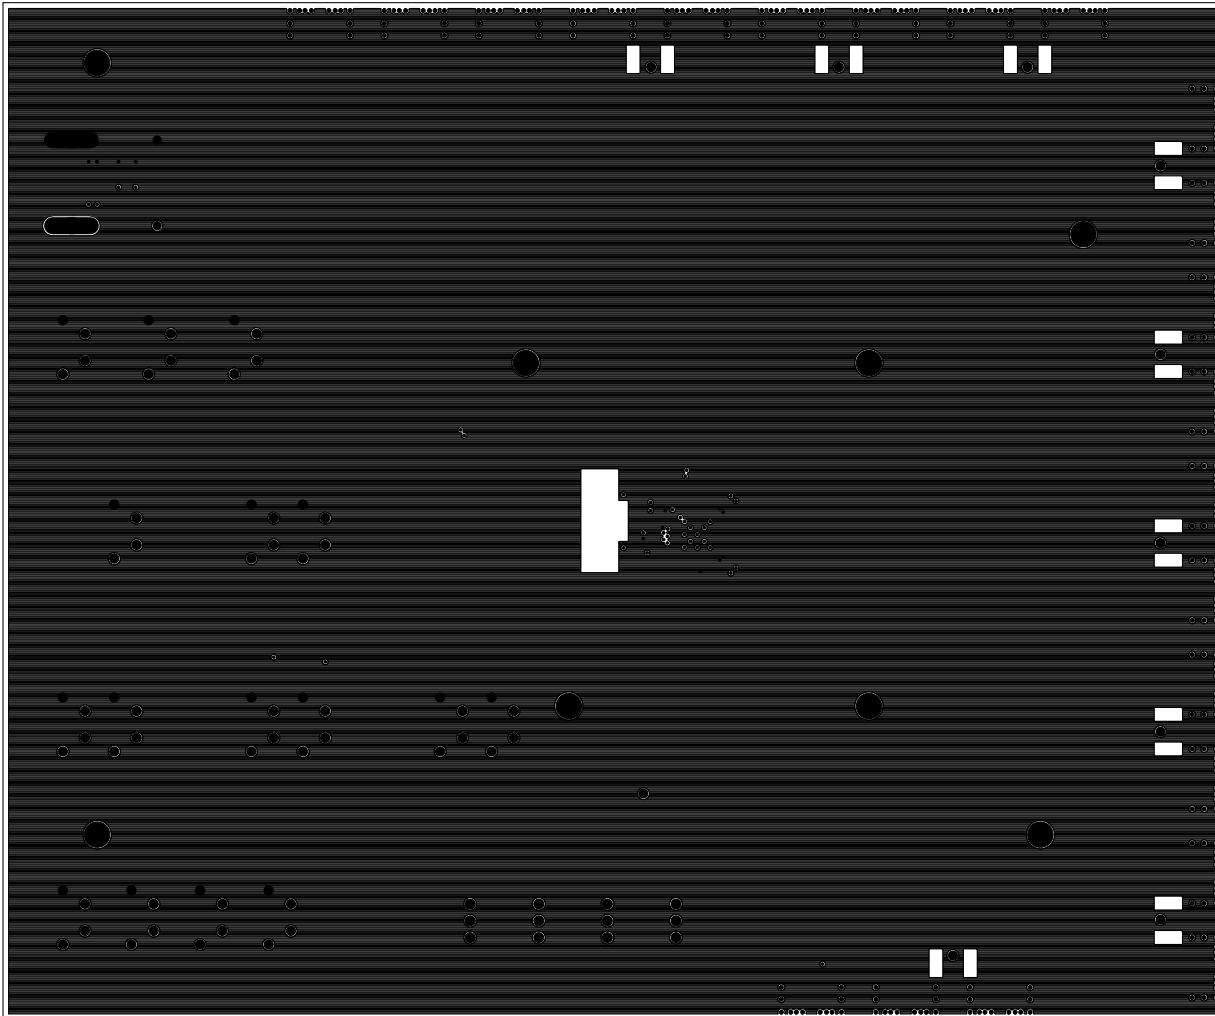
MAX3637 EV Kit PCB Layout—Power Plane
